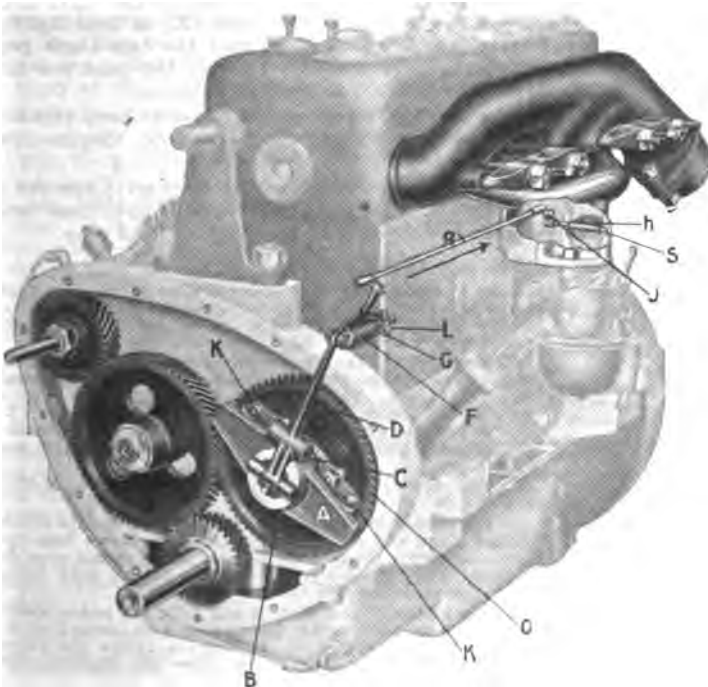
Front view of engine with gear case cover removed showing gears and governor action. The large idler gear between the two small gears drives the large cam gear and magneto and circulating pump gear.
